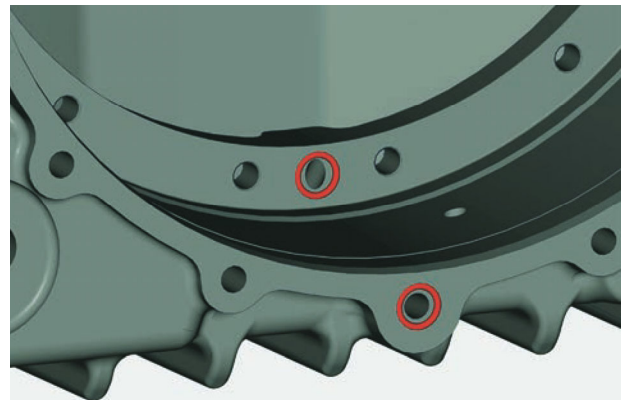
Remove the pressurised lubrication circuit o-rings.
